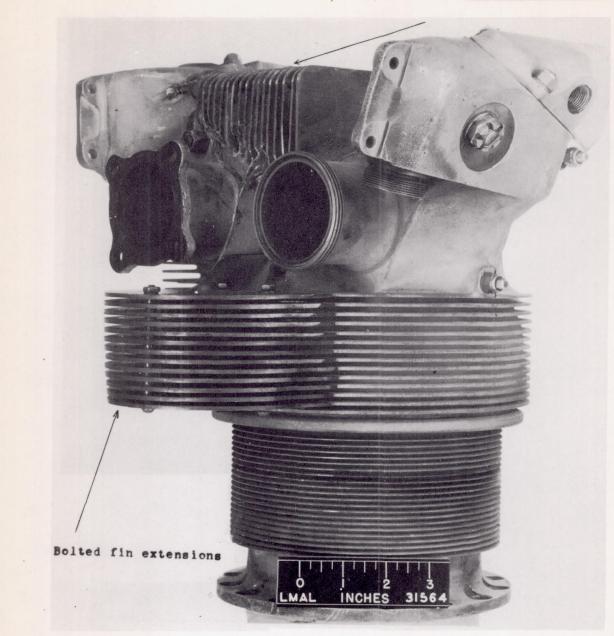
View of cylinder 1 showing welded fin extensions.
